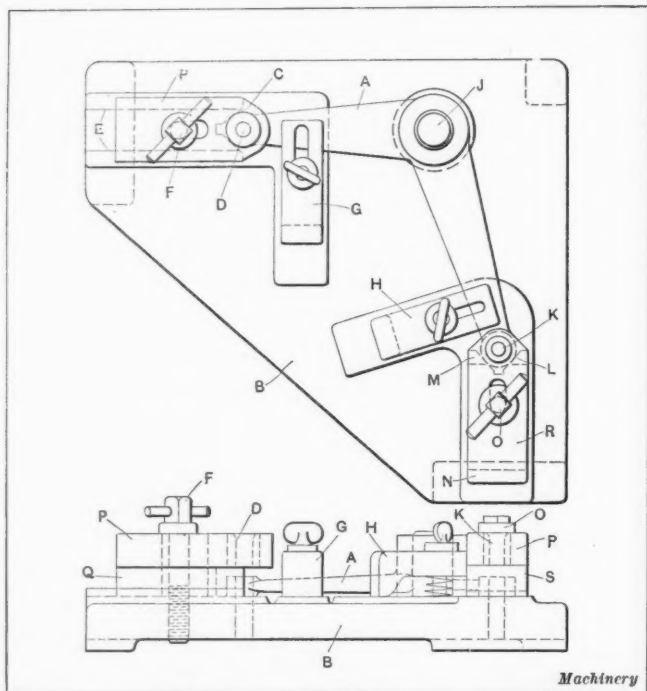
Drill Jig with Floating Bushings and Locating Vees
